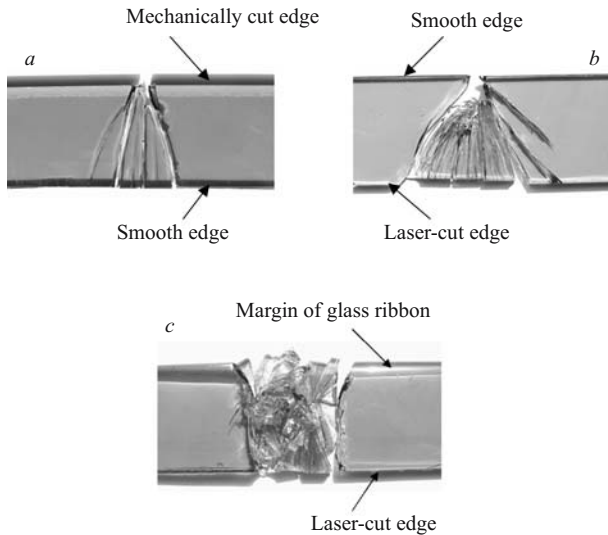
Character of fracture of glass samples in testing for transverse bending: *a* and *b*) samples with mechanically cut and laser-cut edges; *c*) edge of glass ribbon with laser-cut edge.
